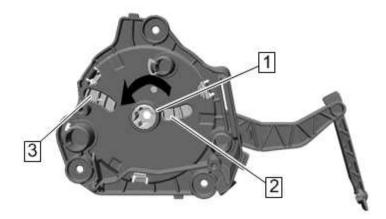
Mode Control Cam Channel Courtesy of GENERAL MOTORS COMPANY
